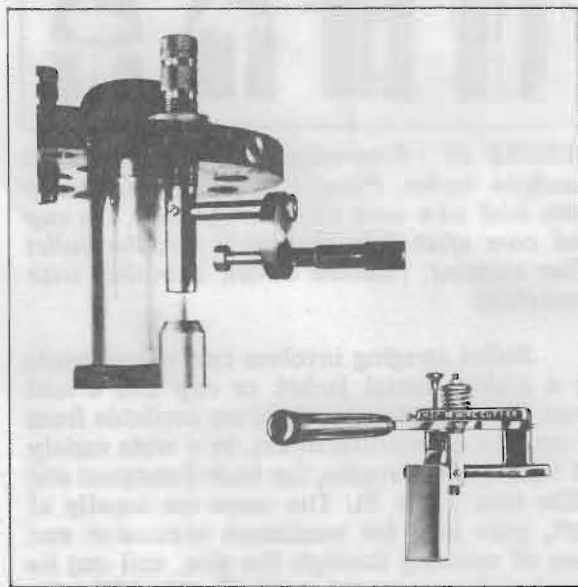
Core cutting tools range from elaborate mount-on units like the Hollywood cutter (top) to simple bench devices like the Herter cutter (bottom).
